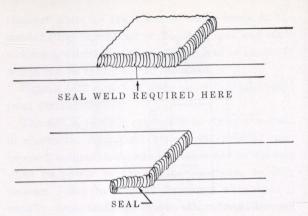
Diagrams to illustrate the sealing of lapped joints, essential in welding aluminum when flux is used.
